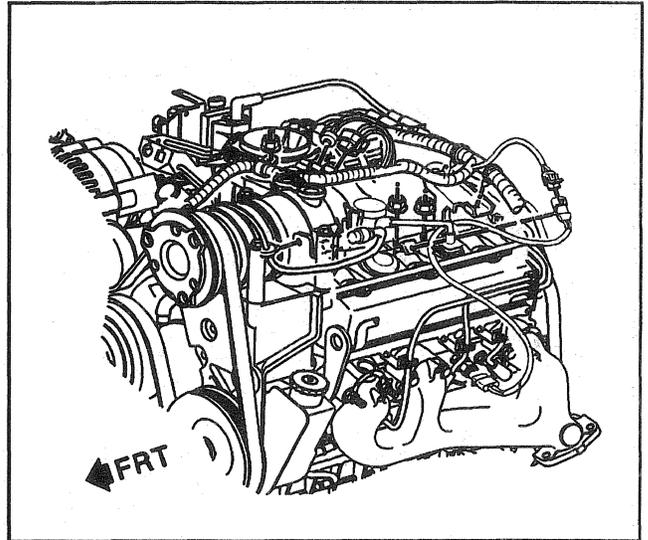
Engine Wiring to A/C Compressor (4.3L)
